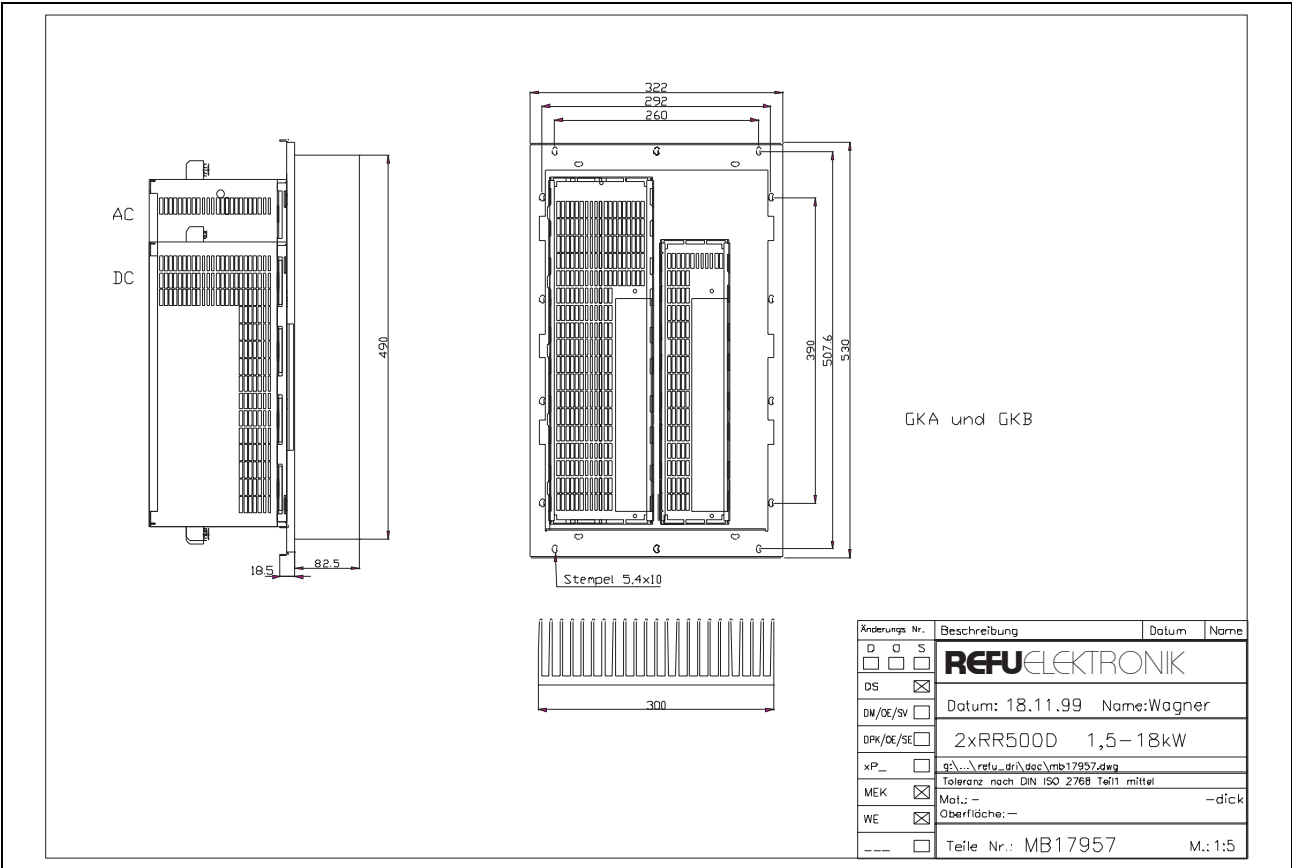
Project documentation; Dimension drawing with overall dimensions and mounting holes
